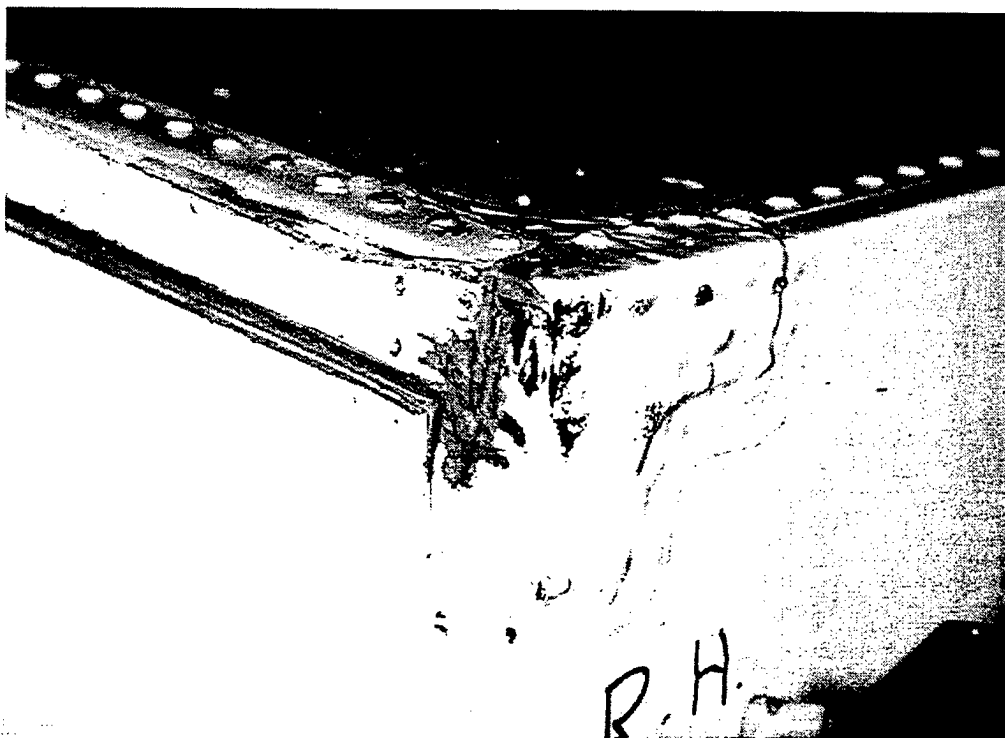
POSTTEST AUXILIARY FUEL TANK FRONT UPPER RIGHT CORNER CLOSE VIEW 2
